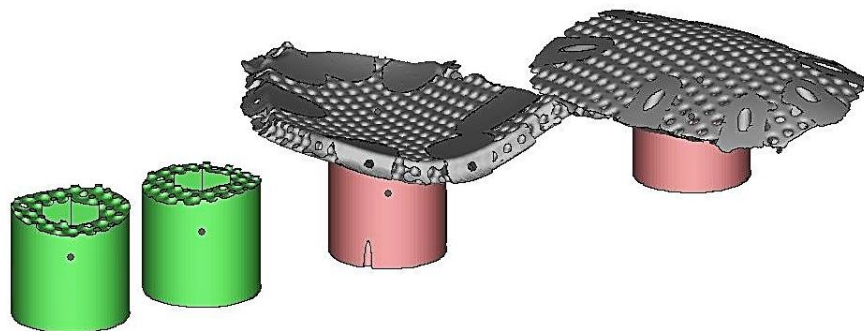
Laser sintered mounting fixtures for dimensional accuracy analysis of cranial implants
